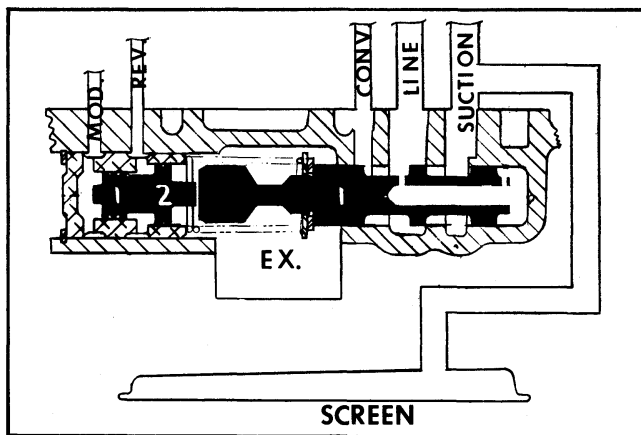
B-8 Main Pressure Regulator Valve - At Idle
